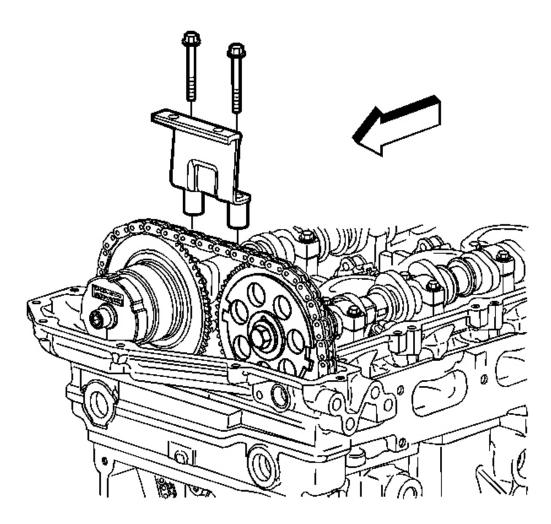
View Of Top Chain Guide Courtesy of GENERAL MOTORS CORP.
